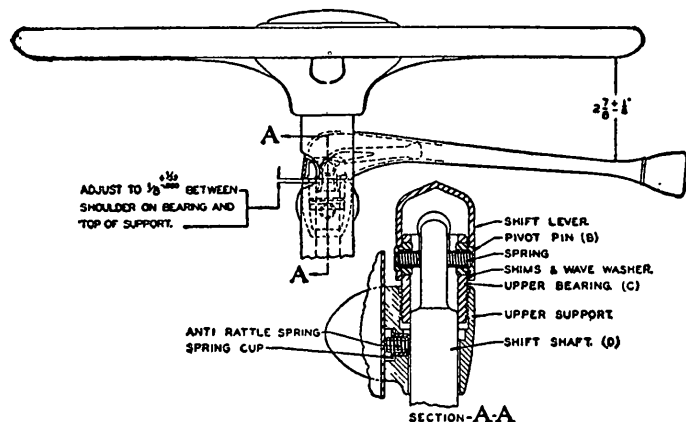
Gearshift lever adjustment, 1940-48 with synch mesh transmission
